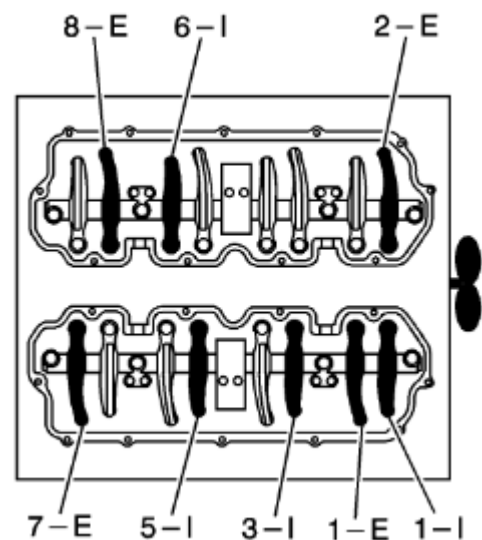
Valves adjusted with cylinder one at compression stroke TDC
